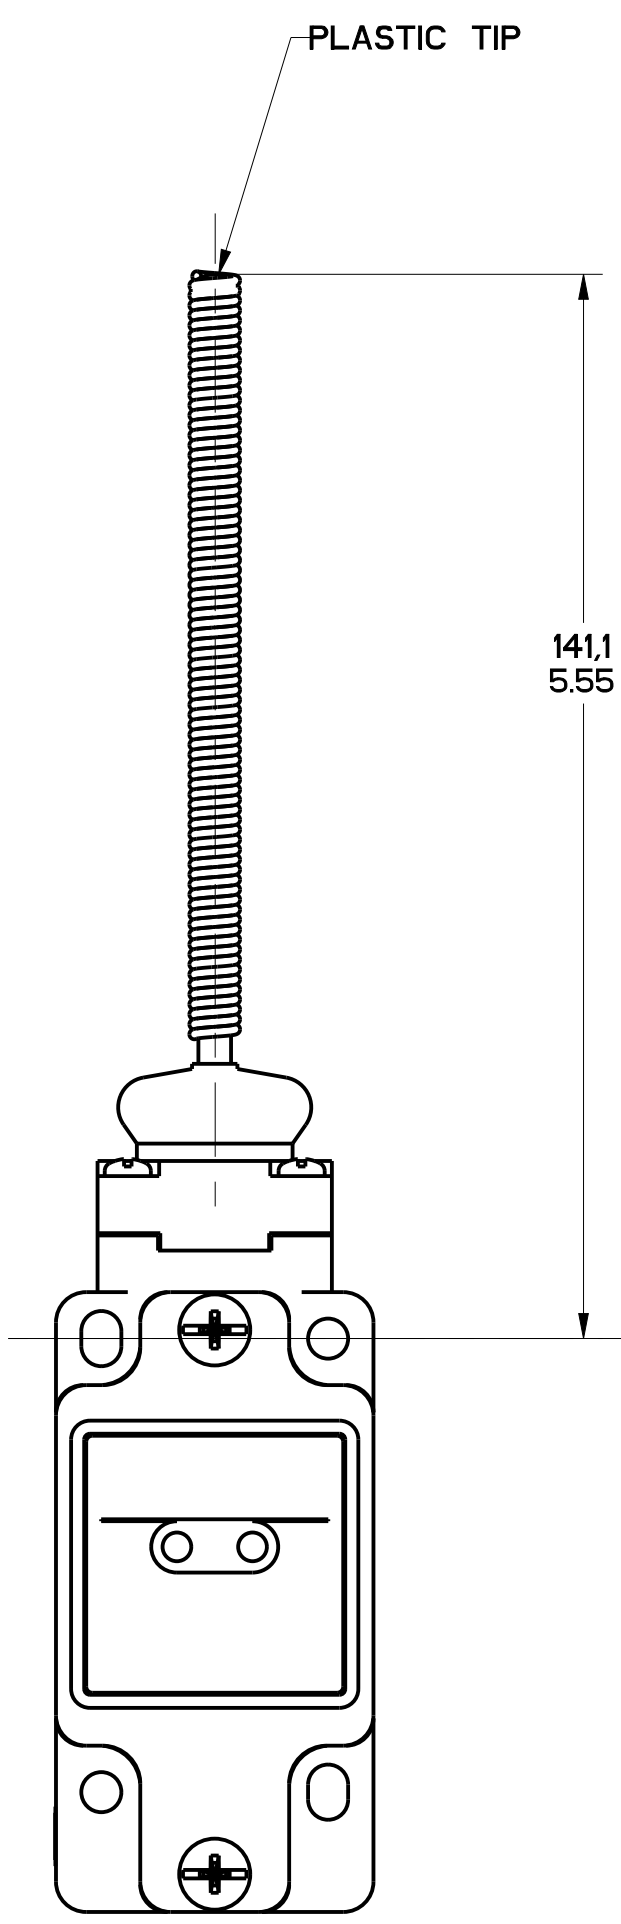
WOBBLE HEAD, AND CAT WISKER HEAD COIL ACTUATOR, OTHERWISE REFER TO FIGURE 1
